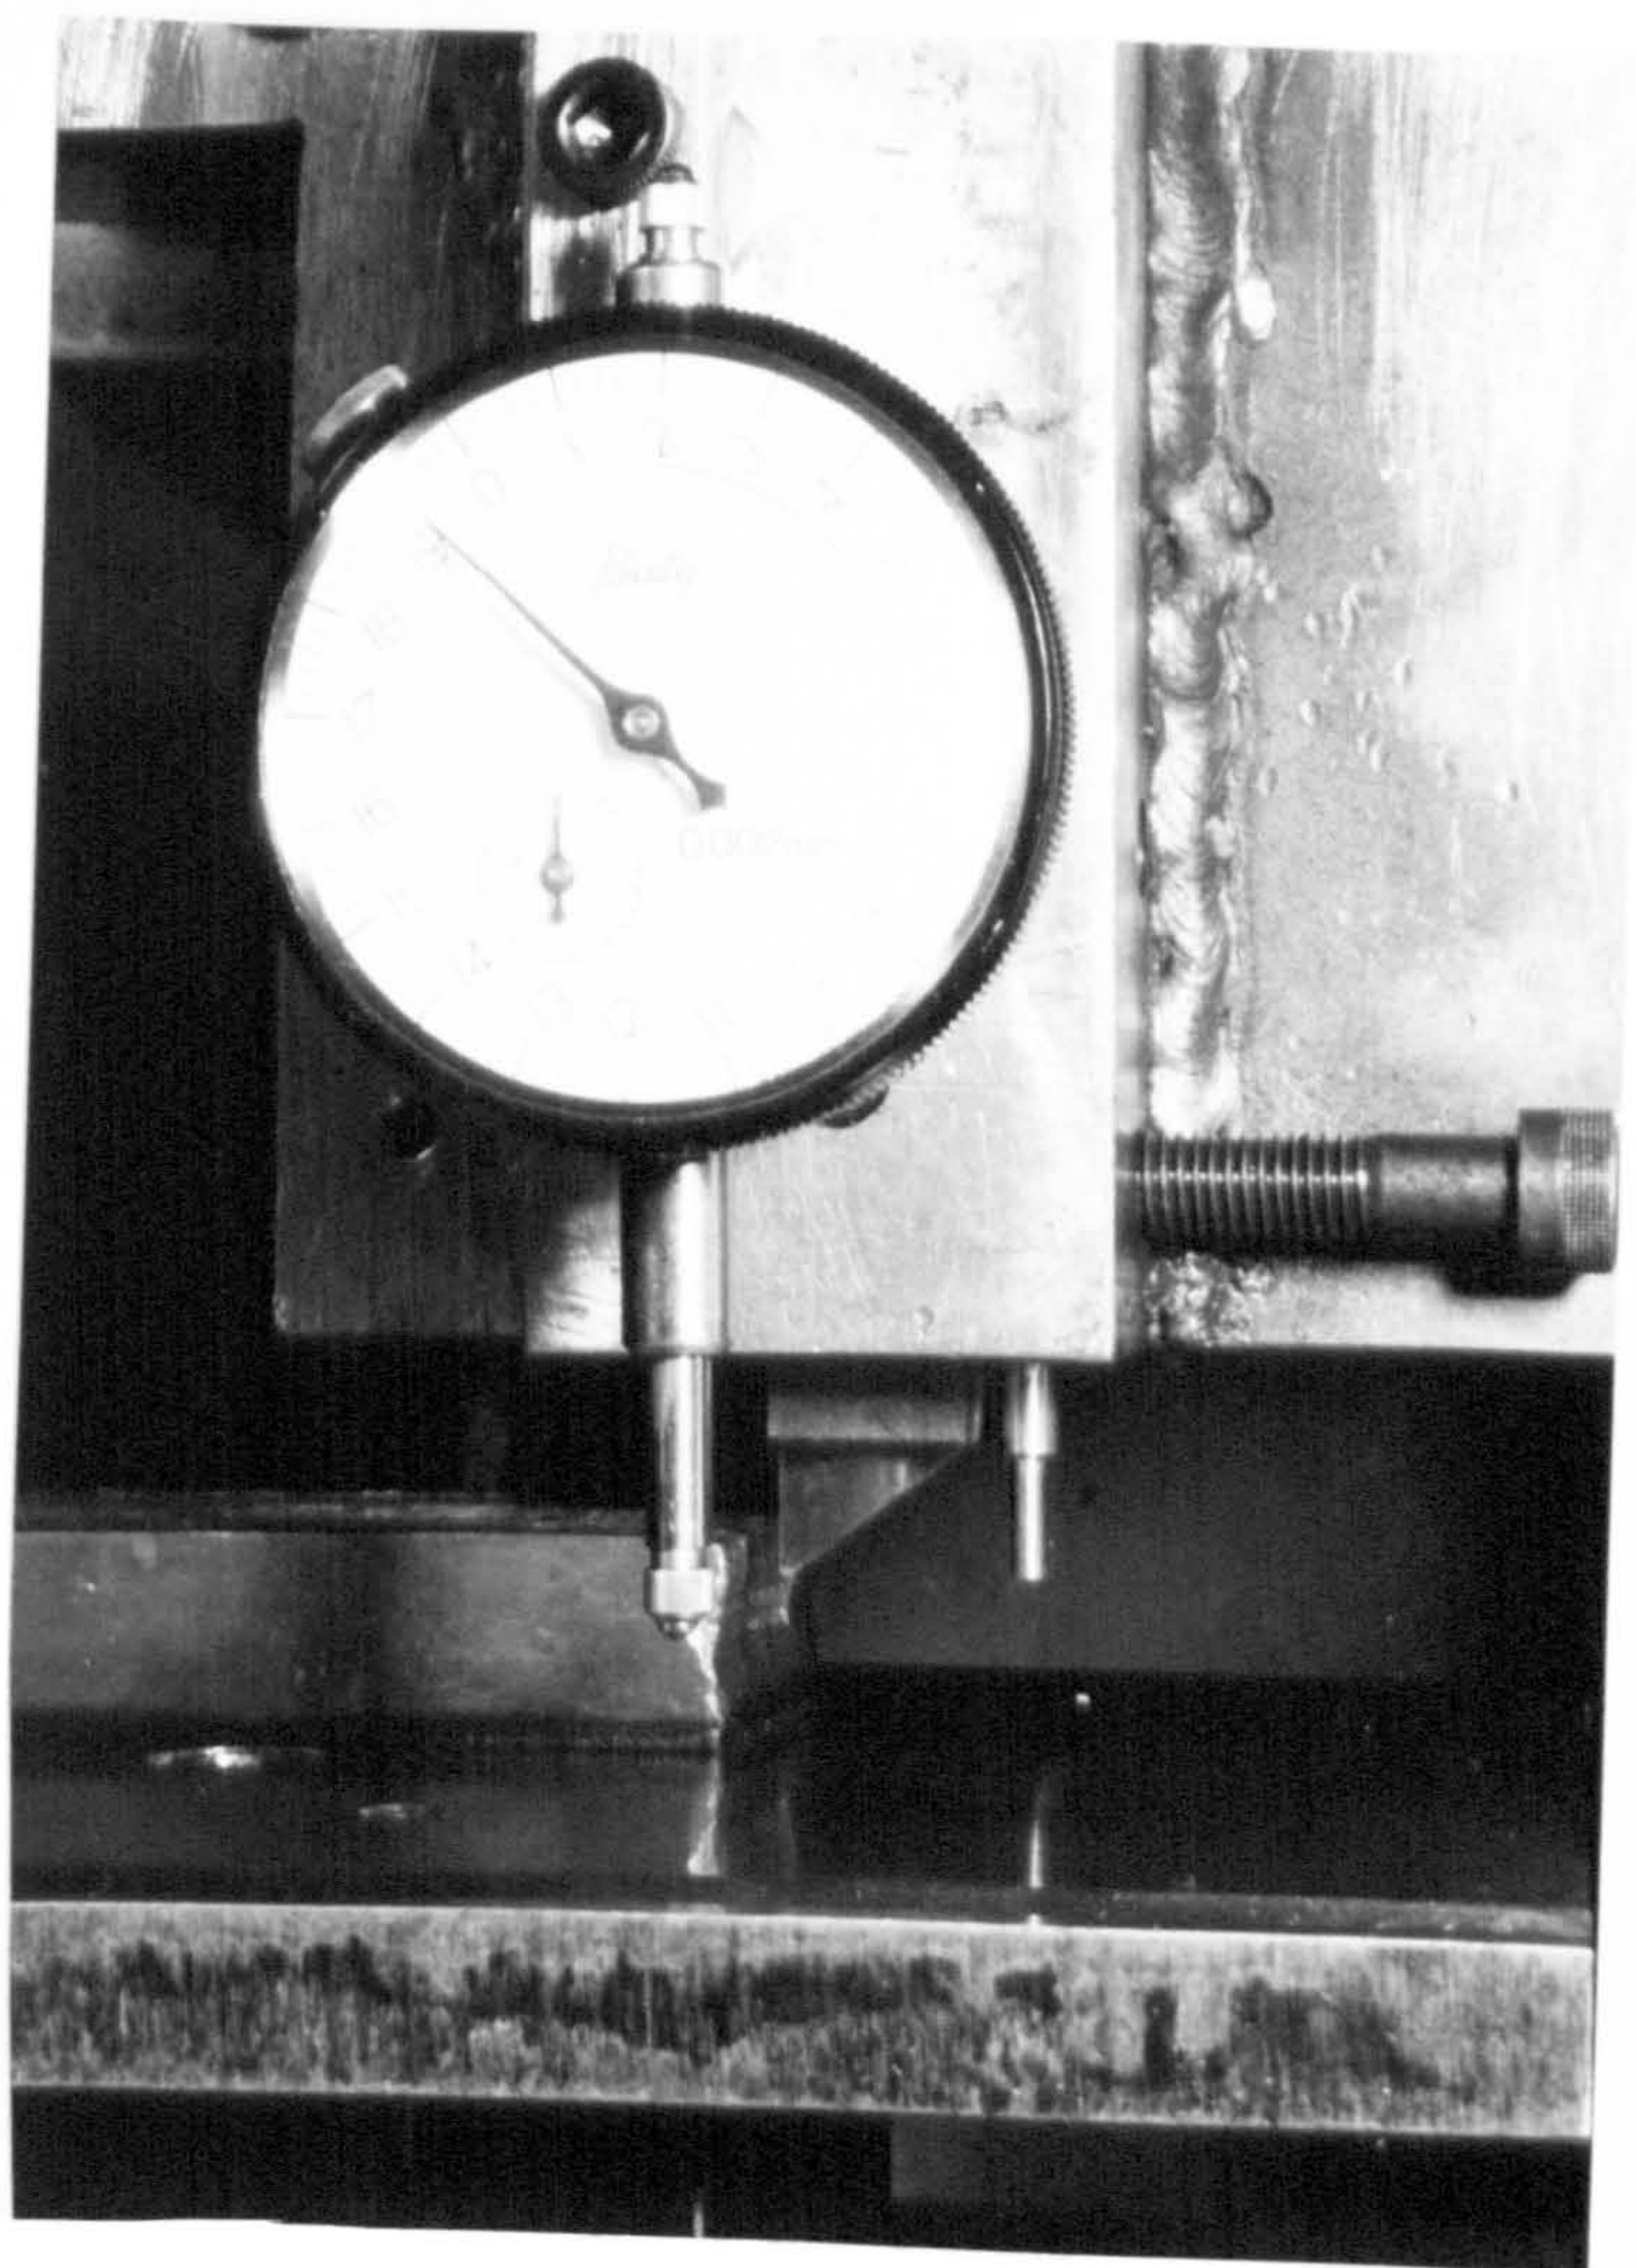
VIEW OF THE CUTTING TOOL-WORKPIECE SET-UP FOR SIMULATION TESTS
